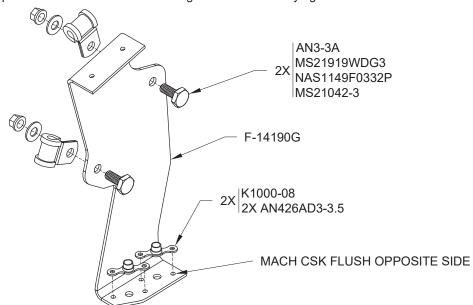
A: CABLE SUPPORT ASSEMBLY
